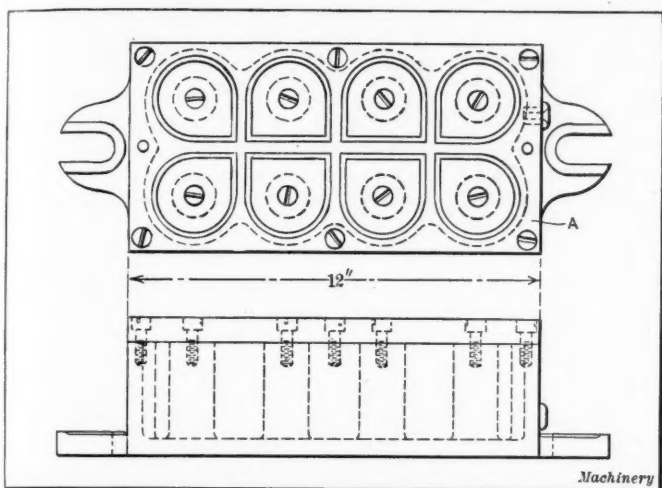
Multipolar Chuck for Use on the Planer or Milling Machine
